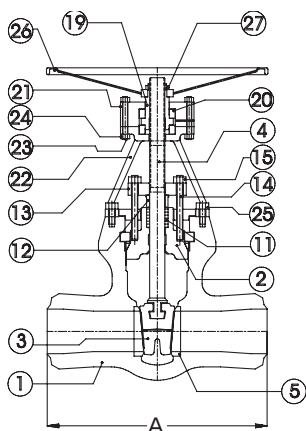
B-F Flex Wedge, Butt Weld Ends
